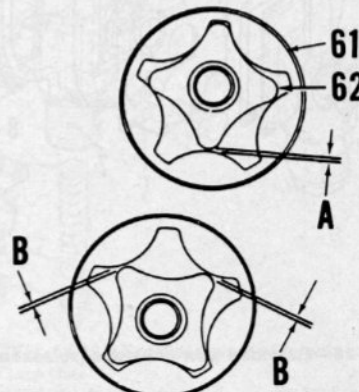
Refer to text for clearances (A&B) between oil pump outer rotor (61) and inner rotor (62).
